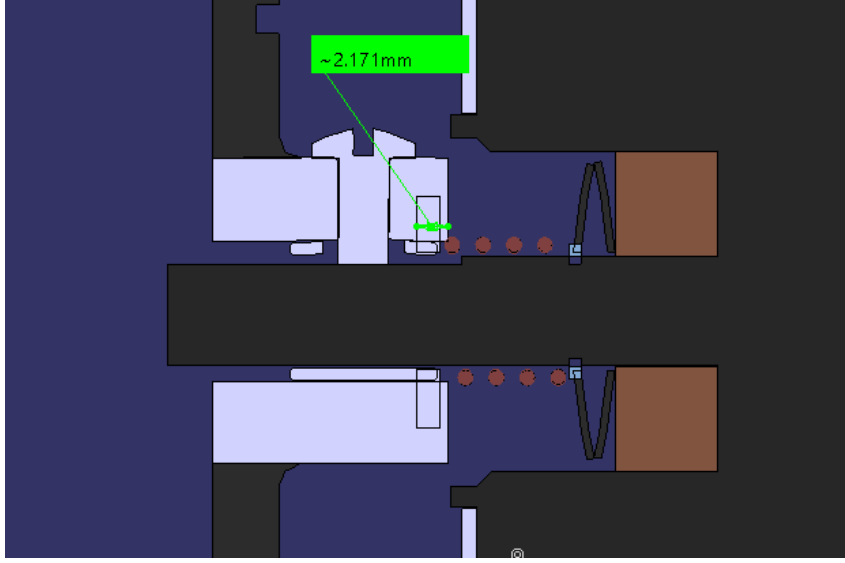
Axial configuration at the upper tolerance limit of the turbine length (e.g. 422 mm), showing approximately 2 mm compression of the spring and resulting preload within the assembly.
